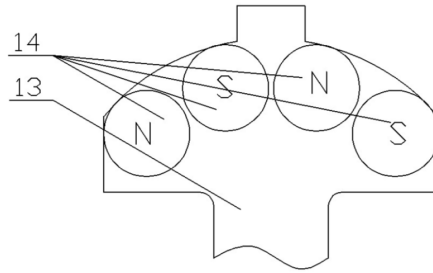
Arrangement of steering knuckle electromagnetic guide block
